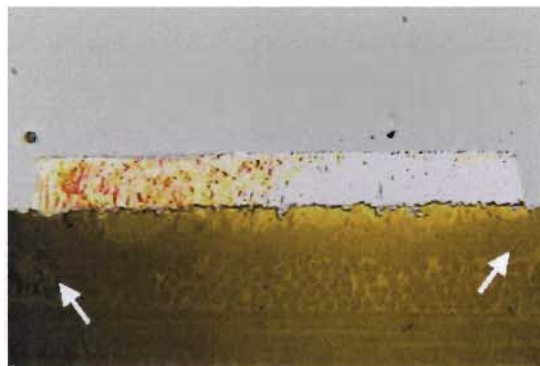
Crack in board resin underneath pad (thick dark area), no edge bond
